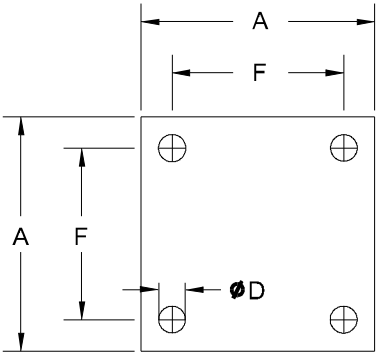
BASE AND TOP PLATE DIMENSIONS
